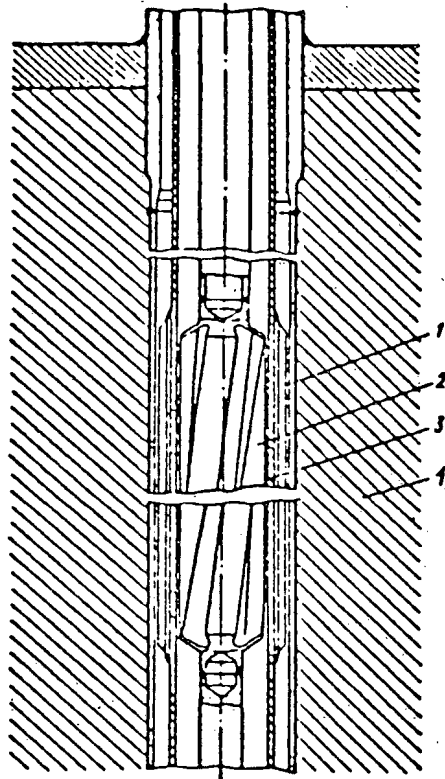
Position of shielding plug in fuel channel: (1) steel sleeves; (2) helical steel plug; (3) channel tube; (4) serpentinite filling
